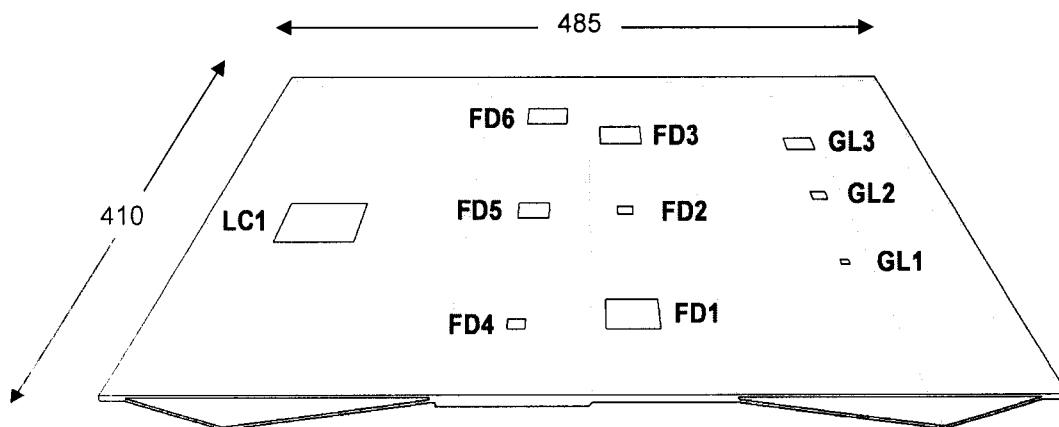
Flat leading edge sample. FD are flange defects, GL are defects between the gel coat and laminate and LC is a defect between the laminate and core (dimensions in mm).
